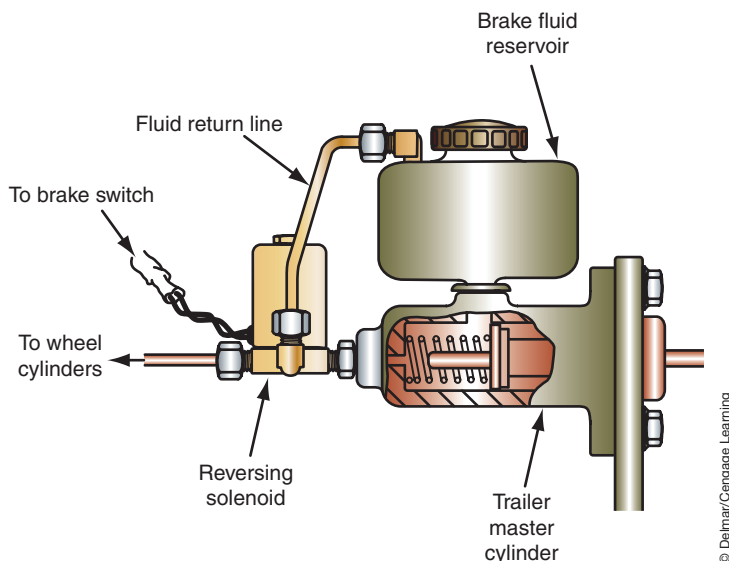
The reversing solenoid is needed with the standard brakes in Figure 1-15 to prevent braking in reverse.
